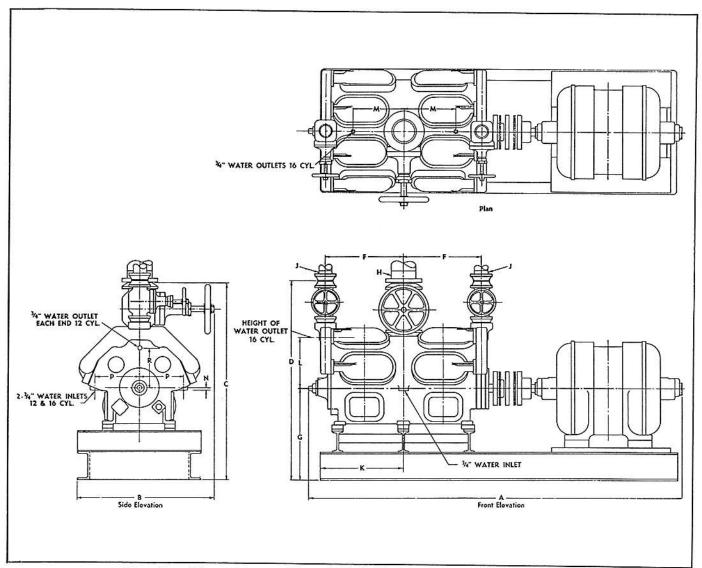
Dimensions - 12 and 16 Cylinder Ammonia - Direct Drive
